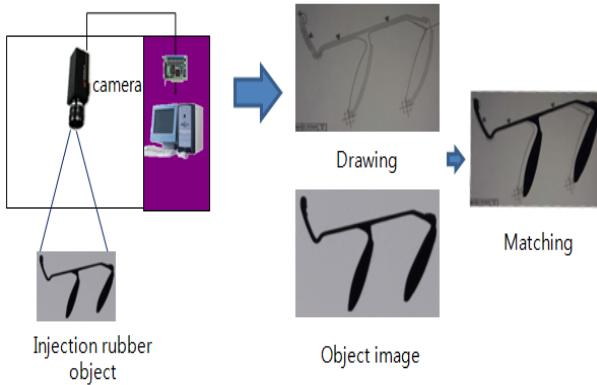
Architecture and processing step of automatic drawing conformity inspection system.
